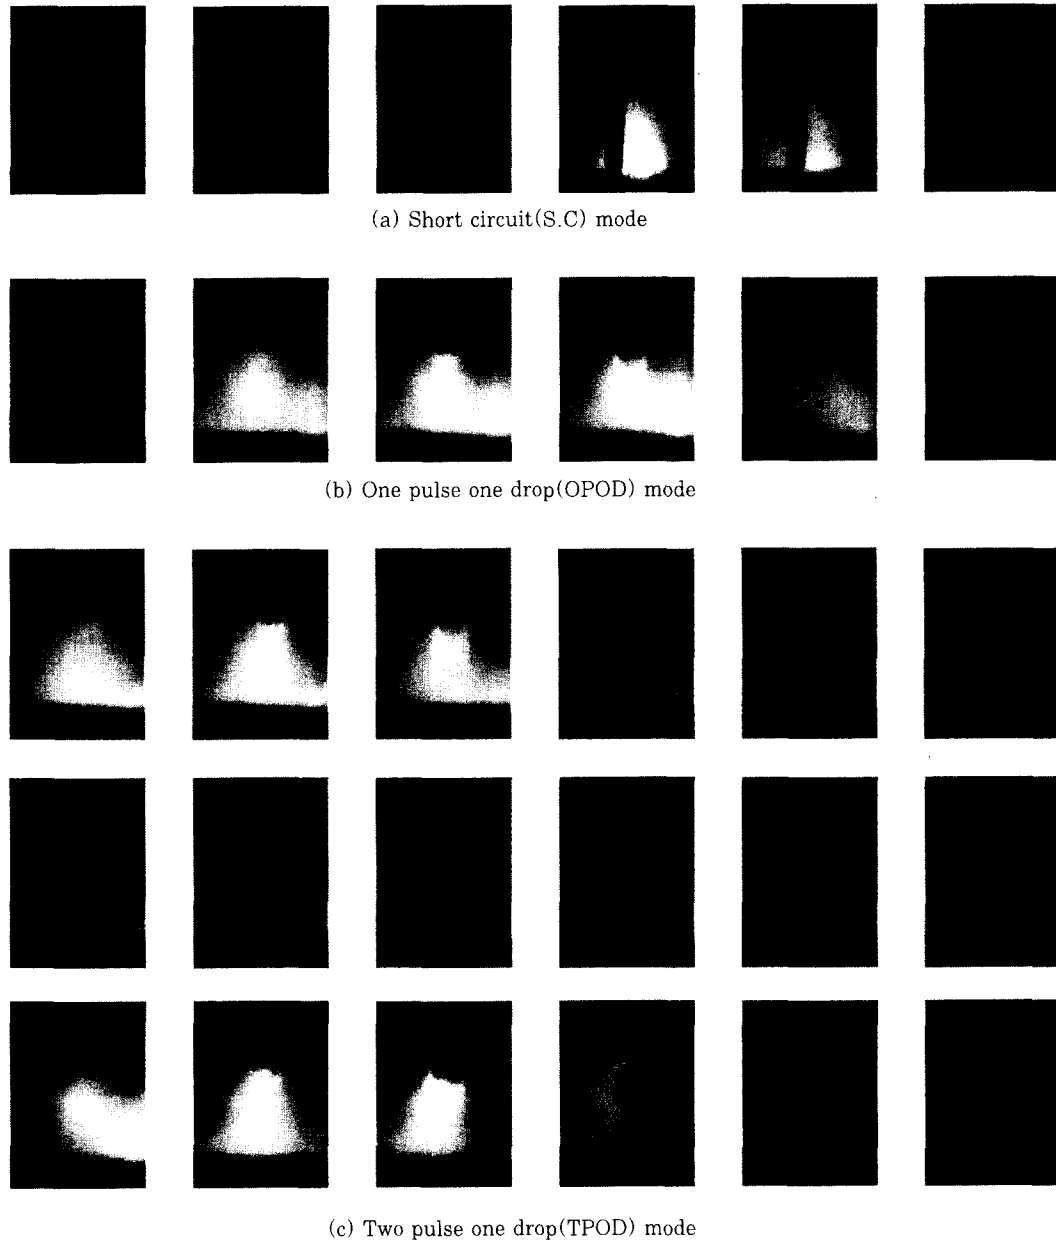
High speed photographs(1000fps) showing metal transfer mode in pulsed current welding condition
